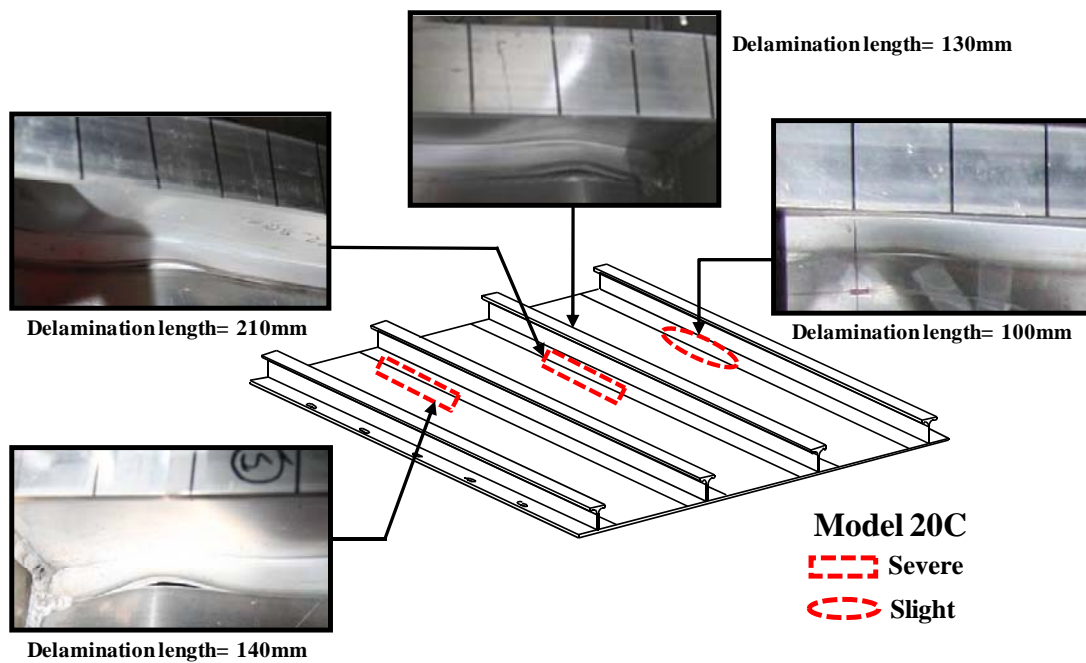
(c) Photo of the delamination failure in test structure 20C, taken at the end of testing
